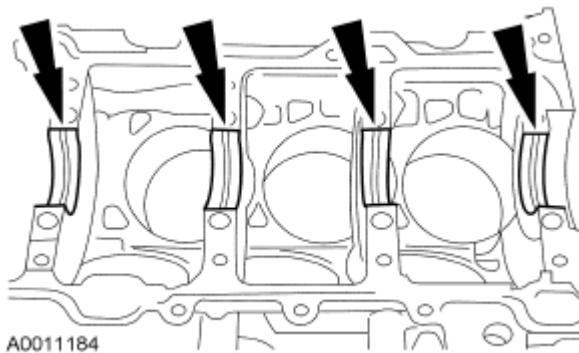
Locating Crankshaft Main Bearings And Thrust Bearing
